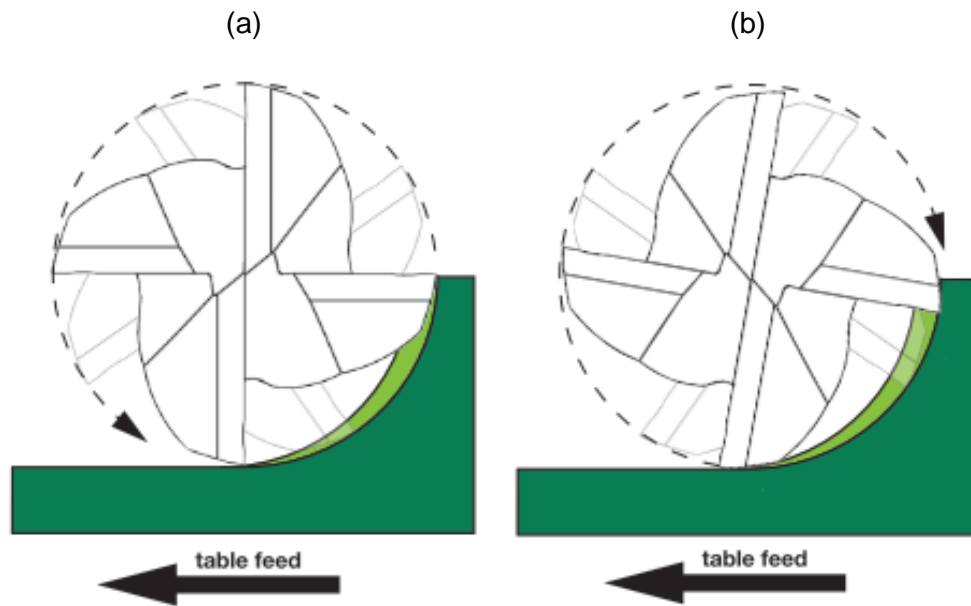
Illustration of (a) conventional milling and (b) climb milling [3]
